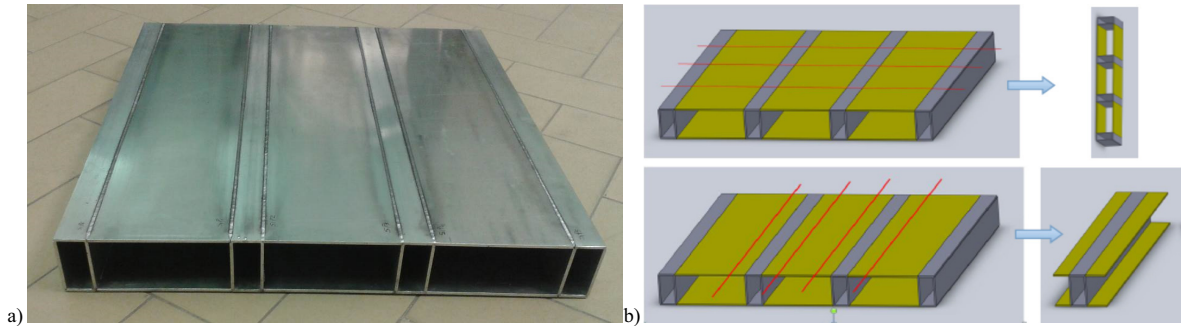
(a) Sandwich panel (b) sections of the panel used for the bending tests.
